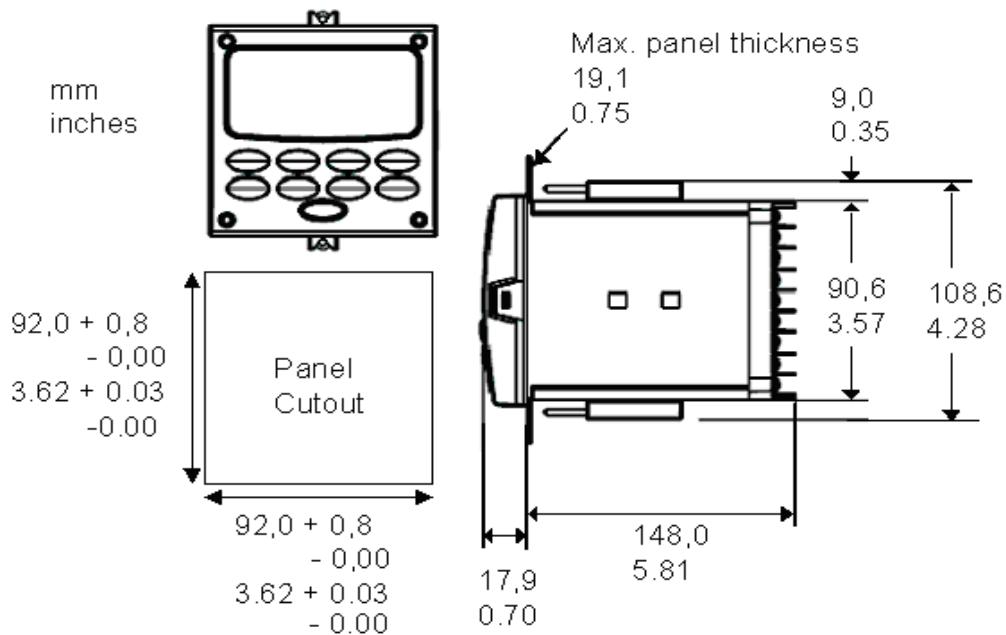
7866 Control Unit/Indicator Mounting Dimensions
